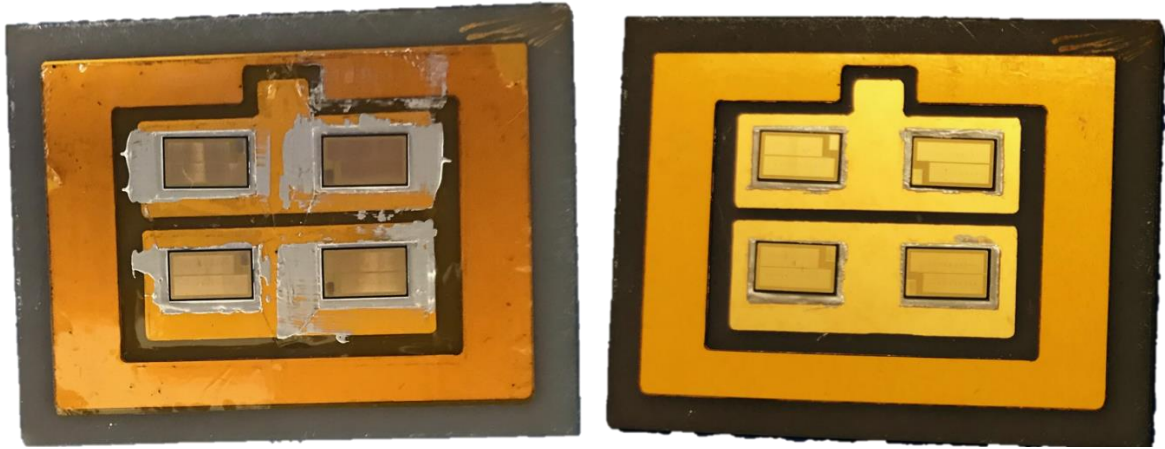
Dies are placed onto printed sinter paste squares and Kapton mask is removed
